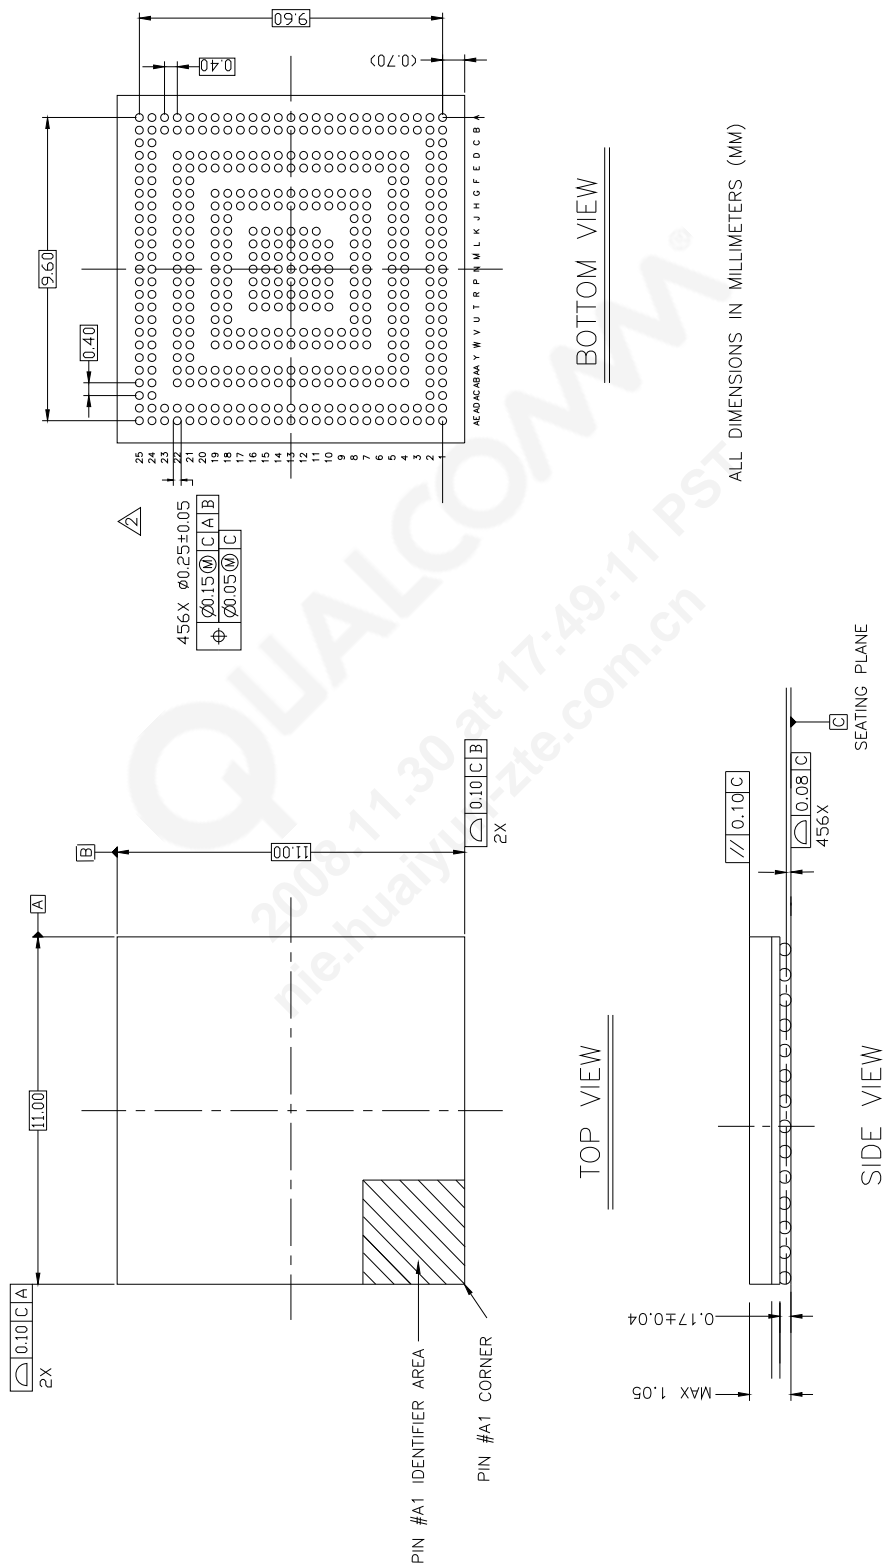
456 NSP (11 × 11 × 1.05 mm) outline drawing
